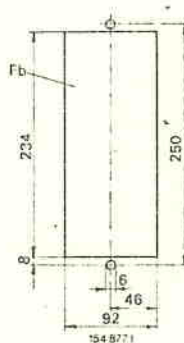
Hole in panel for relays in Fig. 8 and 9
